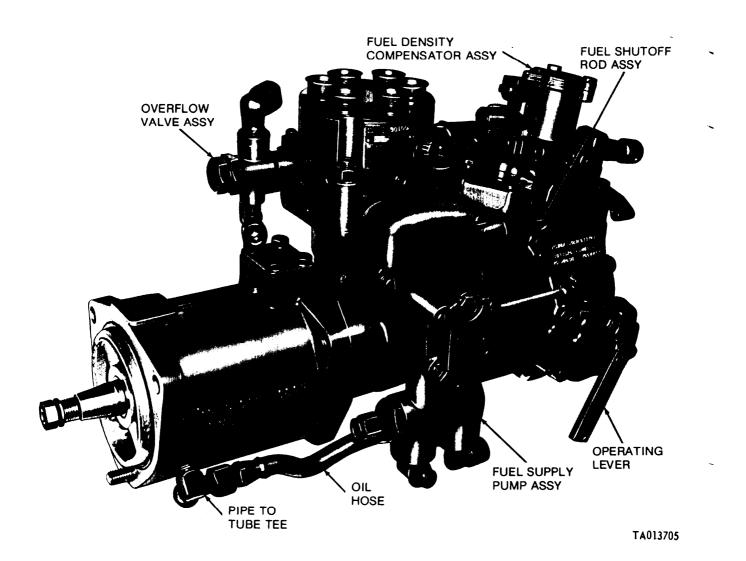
Metering and distributing fuel injection pump assembly (codes C, D, and E), left front view.
